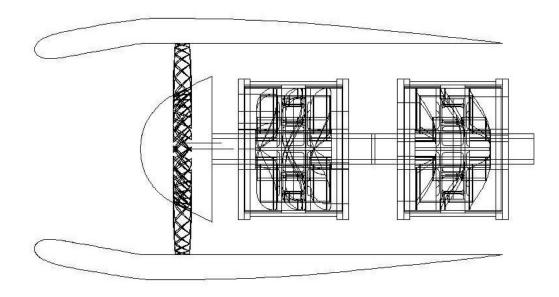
Cross-section of PAX 150 engine with diesel core engine.
